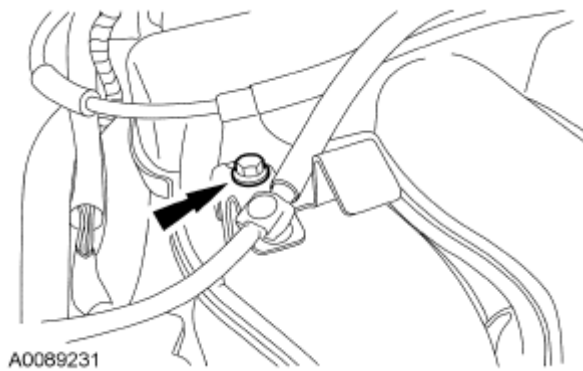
Locating Accelerator & Speed Control Cables Nut
